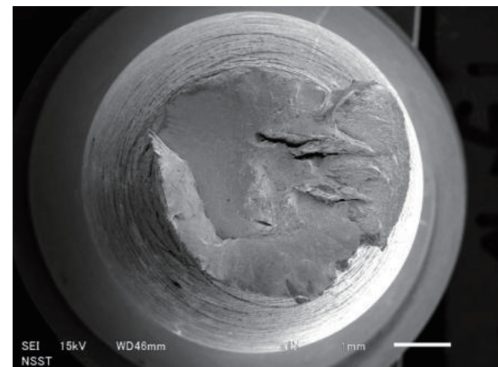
Tensile fracture surface under high-pressure hydrogen
